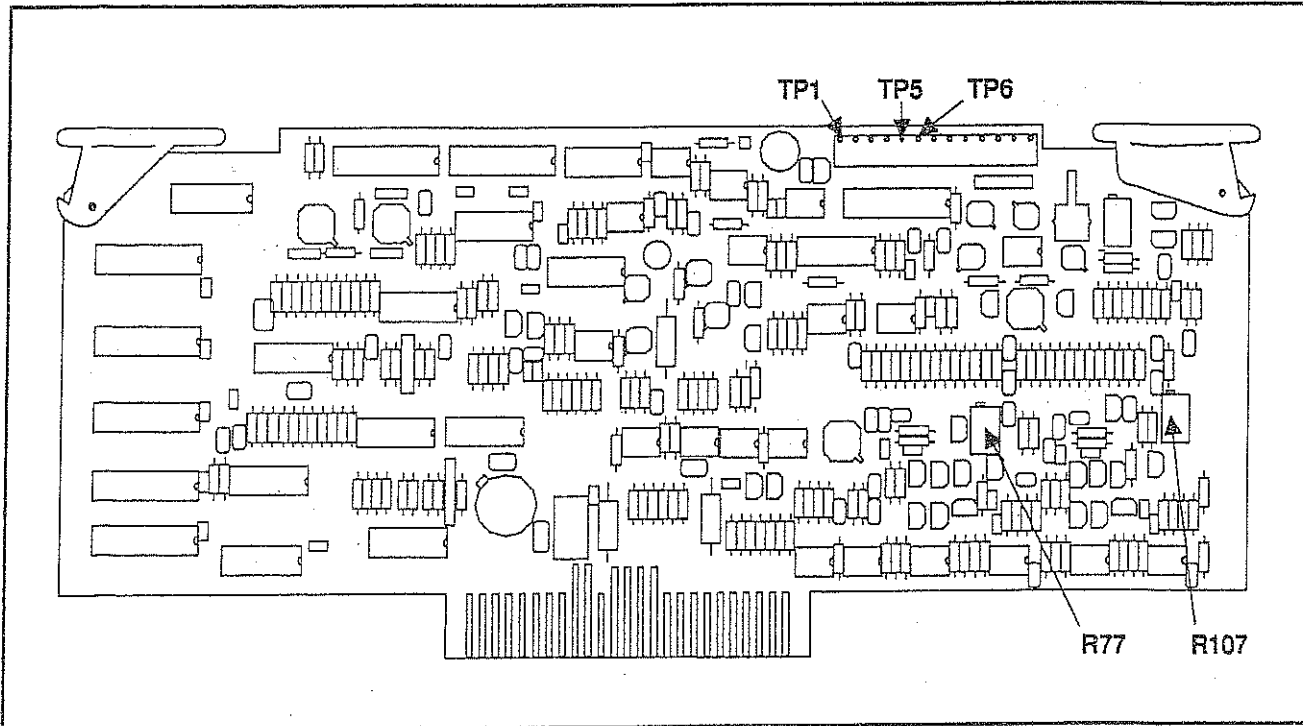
A15 ALC PCB Test Point and Adjustment Locations
